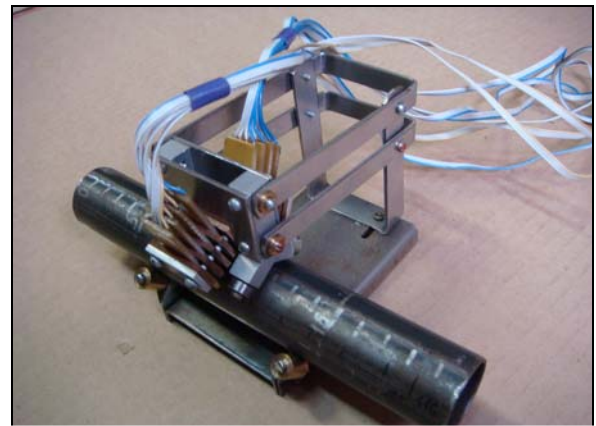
Multiple-unit device to identify magnetic leakage fields used in magnetic inspection of external surfaces of welded pipes
